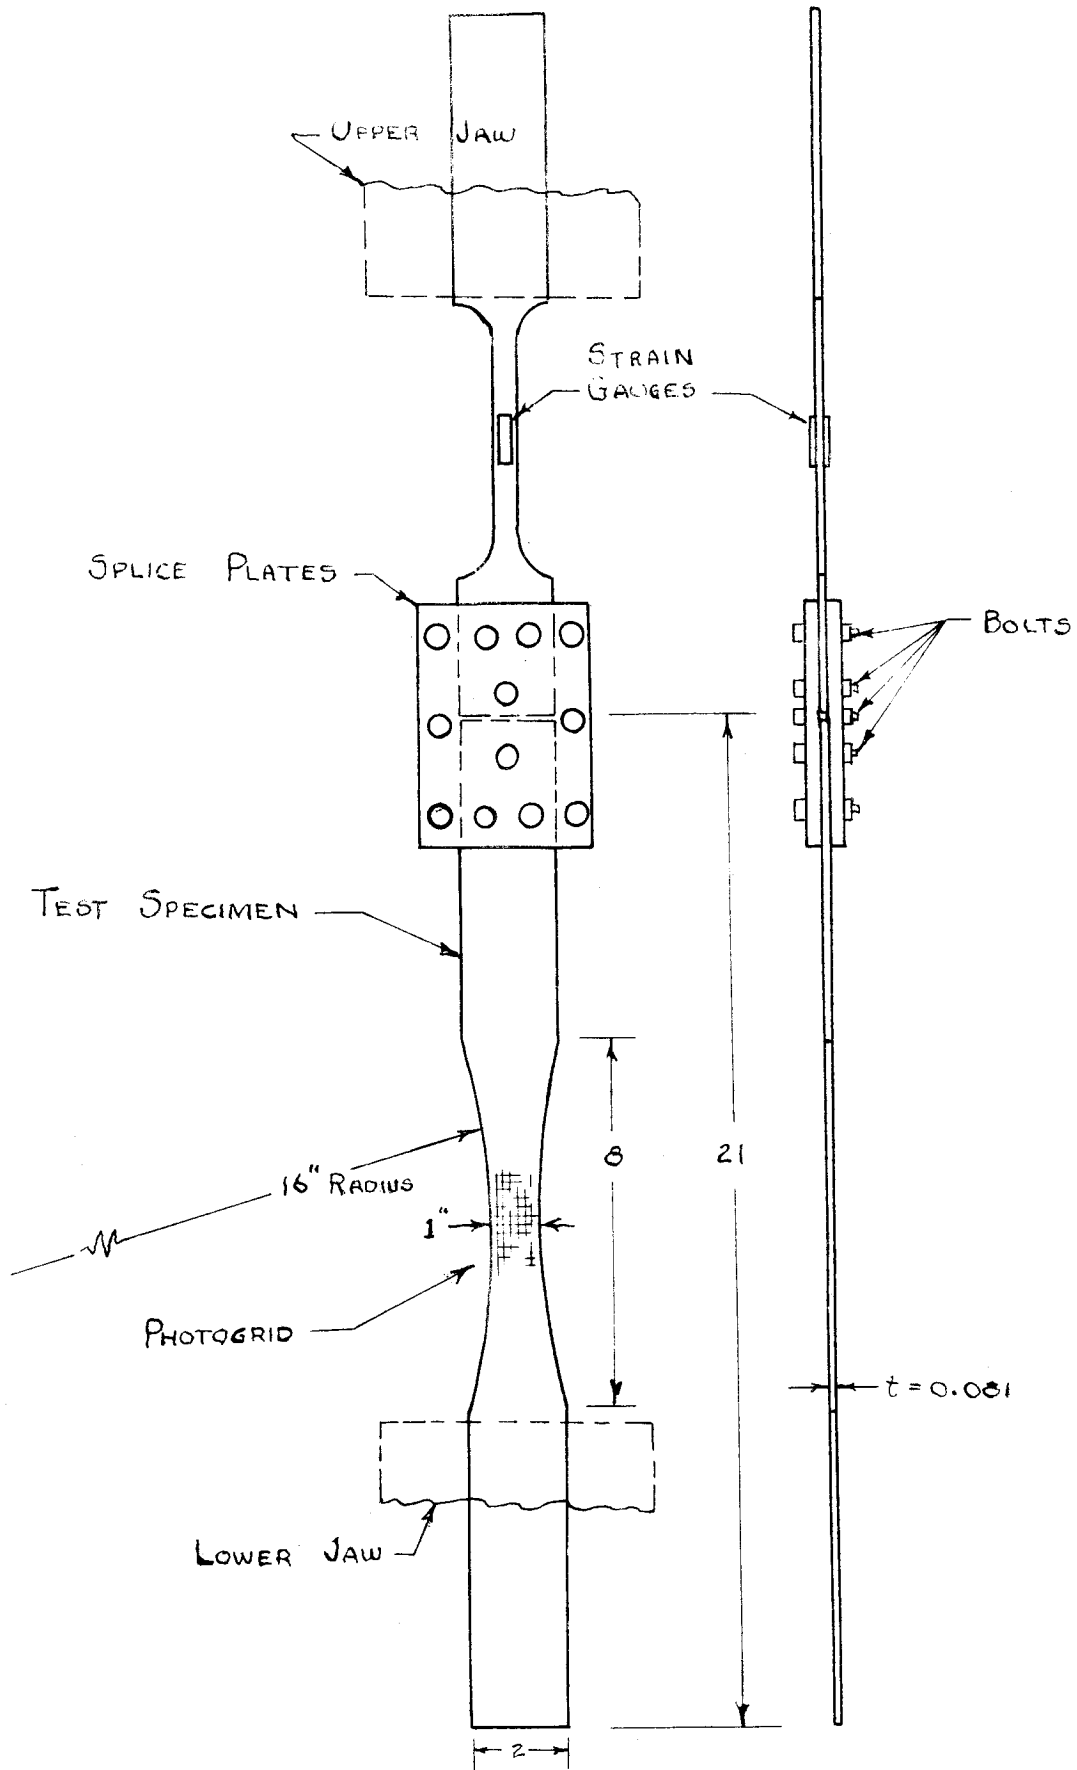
TEST SPECIMEN AND STRAIN GAUGE INSTALLATION
